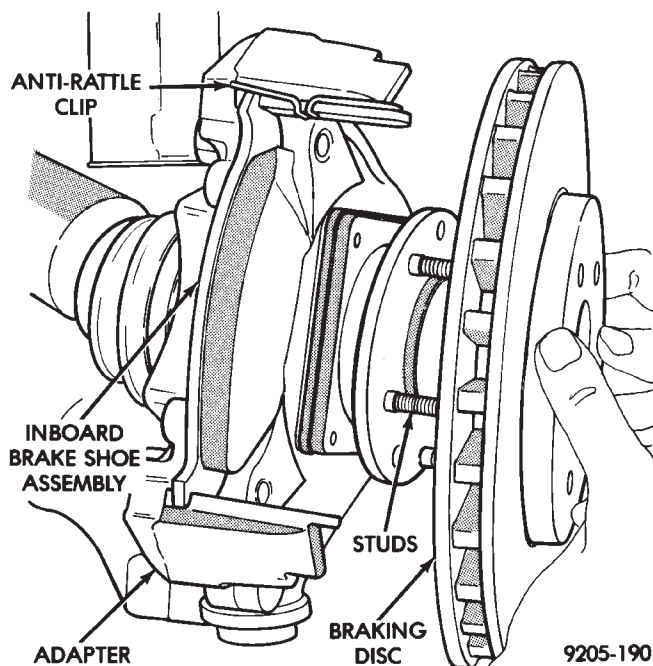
Loosening Family Caliper Assembly From Adapter And Rotor
